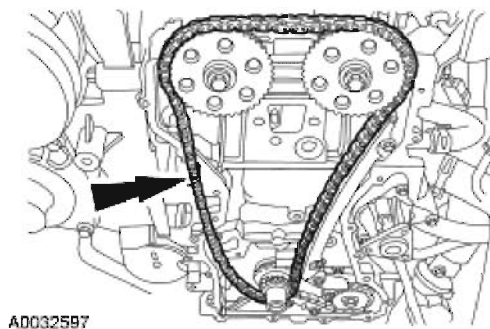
Locating Camshaft Sprocket Bolts
